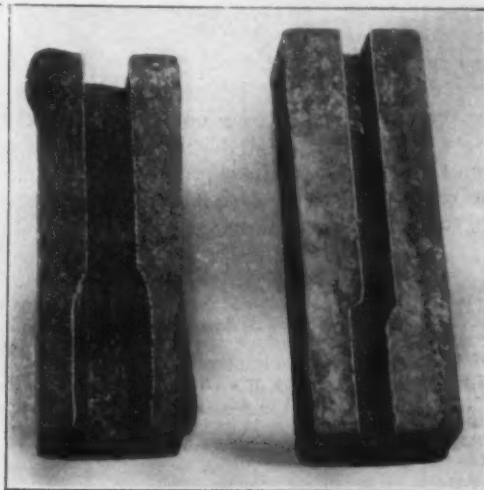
The Iron Molds in Which the Tools Are Placed After They Have Been Heated.
